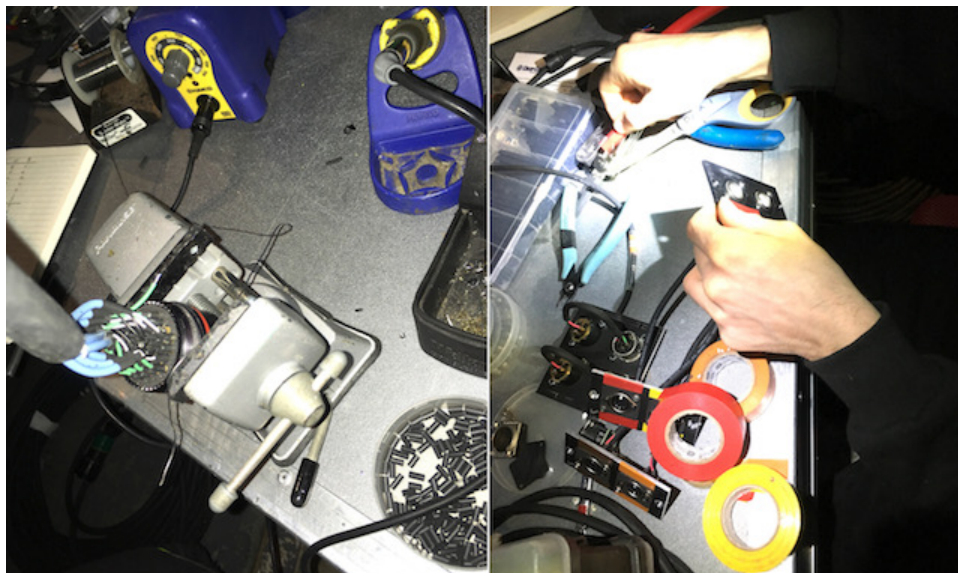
Soldering a multipair cable (left); making chassis-mount MIDI connectors (right)
